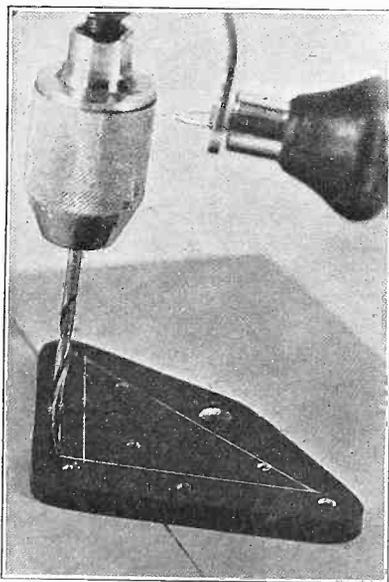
, two holes are drilled outside the triangle, so that mounting screws may be inserted, to enable panel mounting. Since the triangle is to be cut away, the old mounting holes will disappear.
